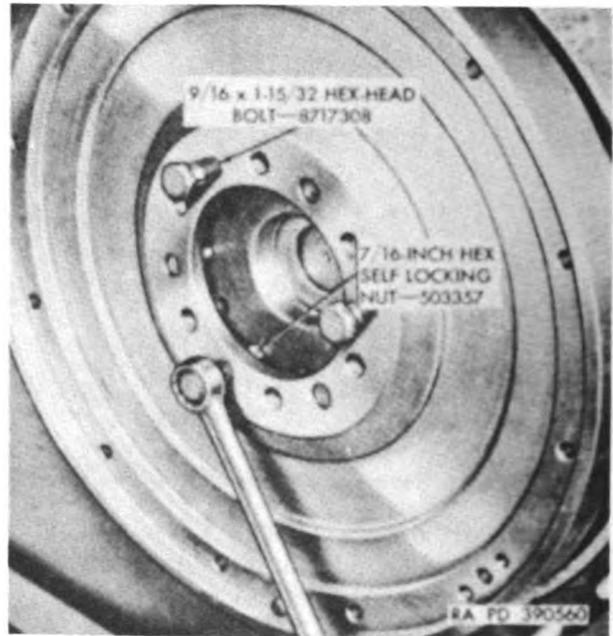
Removing flywheel (model AOSI-895-5 engines only).
